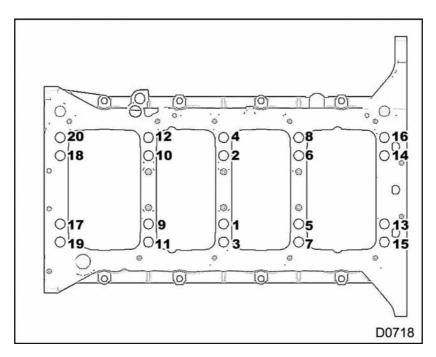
Tightening sequence for main bearing bolts in lower crankcase
